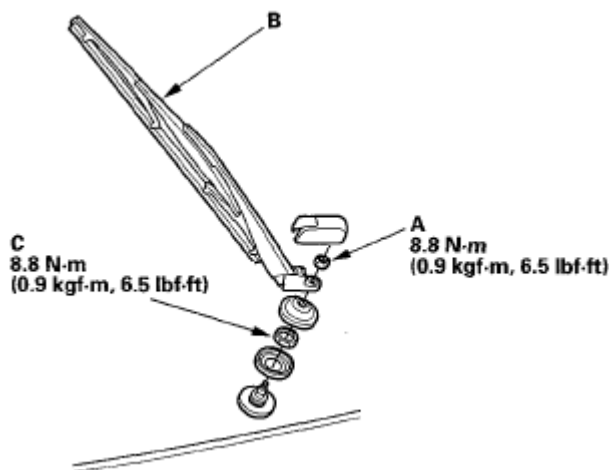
Identifying Wiper Arm And Mounting Nut With Torque Specifications
